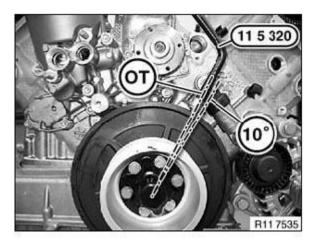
Identifying Special Tool (11 5 320) On Vibration Damper Courtesy of BMW OF NORTH AMERICA, INC.
